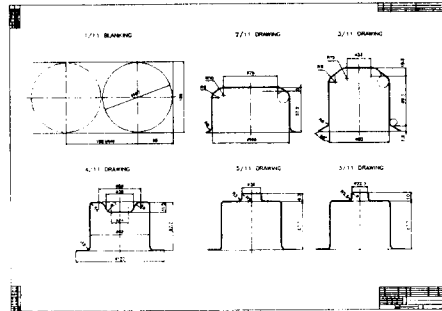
Sequence drawing for the deep drawing parts of the "motor housing" - Industrial practice
